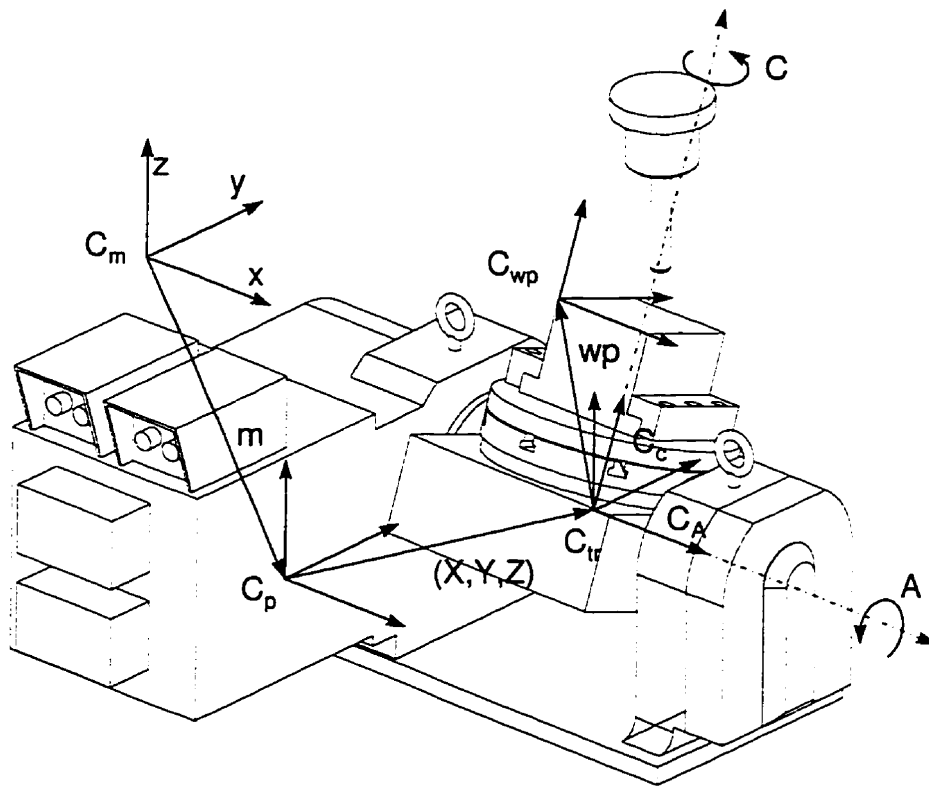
Kinematics of a tilt rotary table type 5-axis machine.
